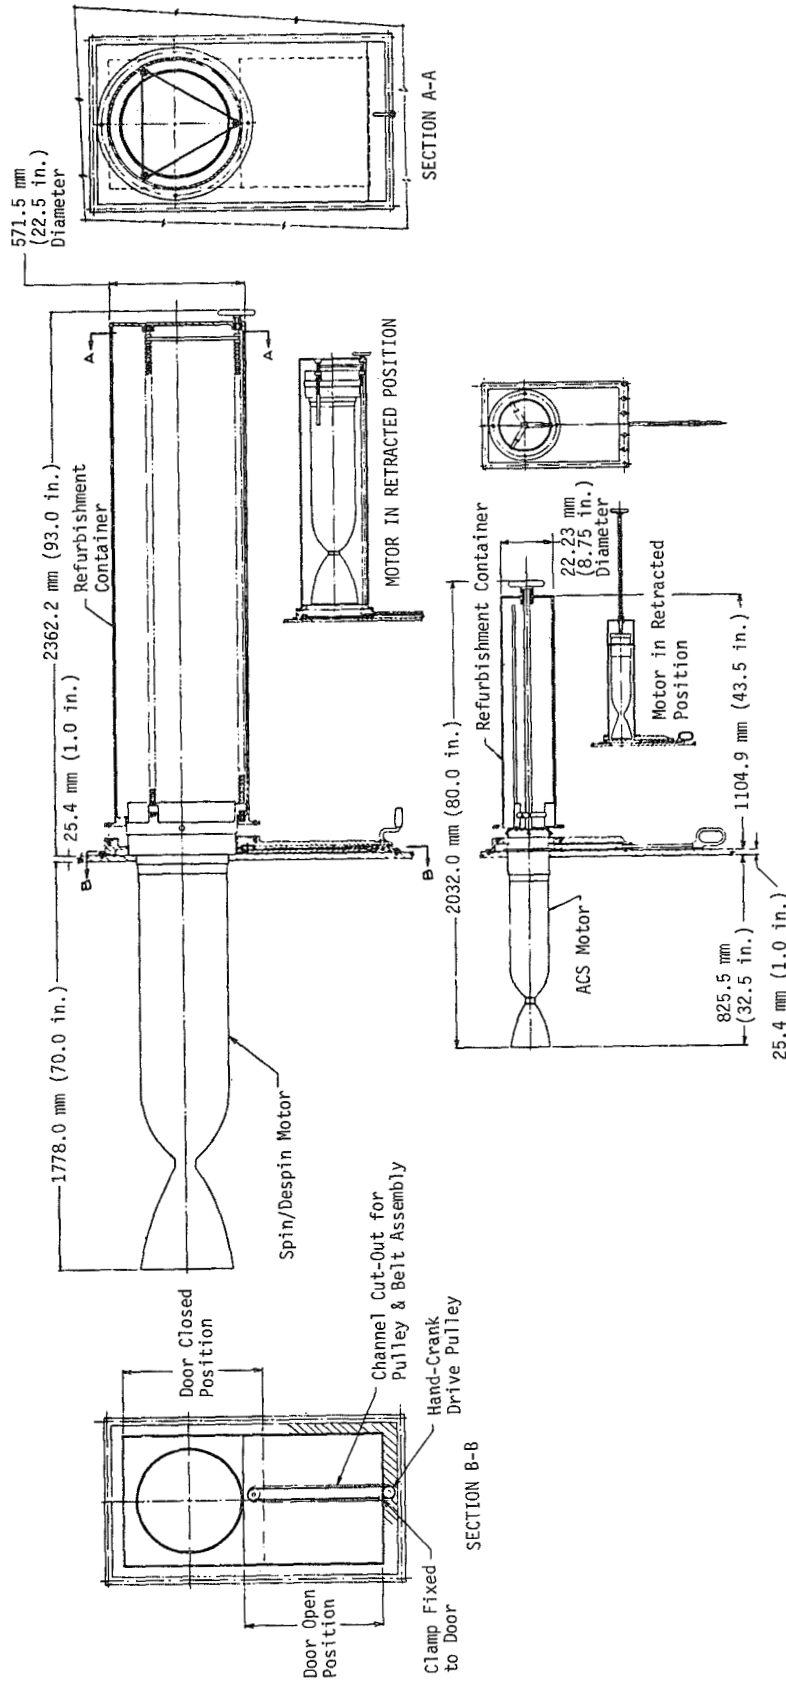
Door Assembly and Container for ACS and Spin/Despin Motors
